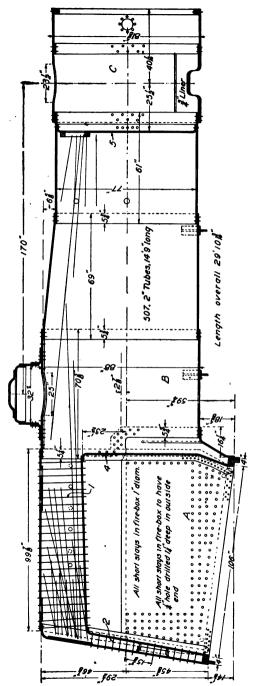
Detailed Drawing of Modern Locomotive Boiler
